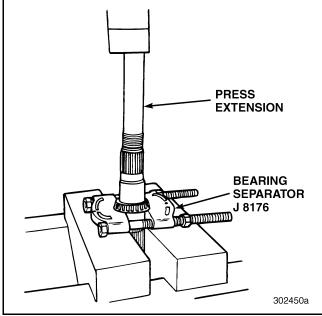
Separating Bearing Cone from Output Shaft (T313L21/T318L21 Shown)
